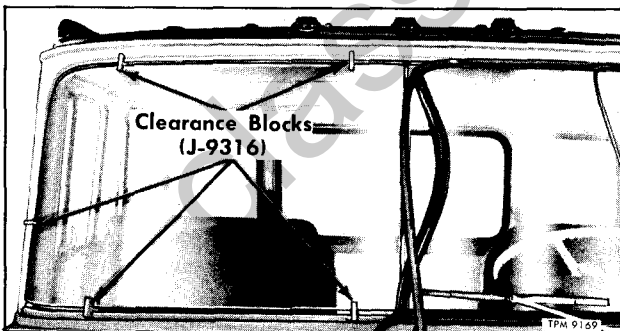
Checking Glass Clearance (Steel Tilt Cab Models)
